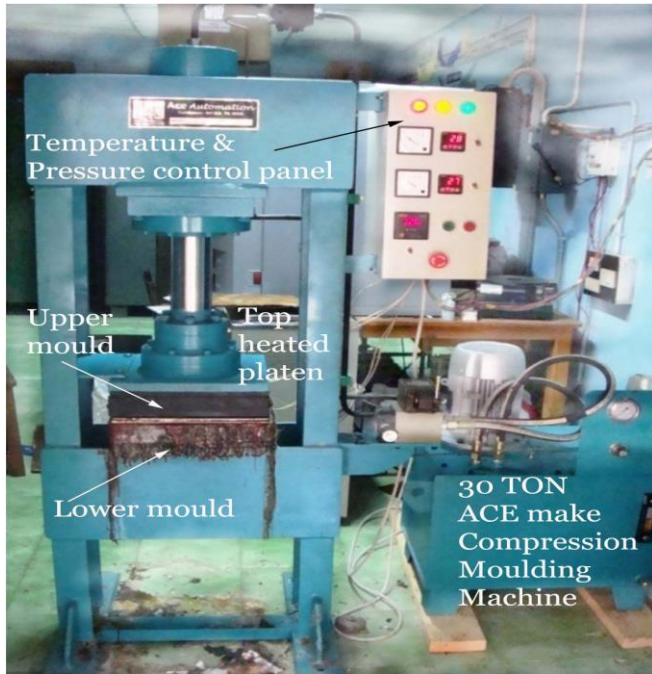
Photographic image of ACE make Compression Moulding Machine
